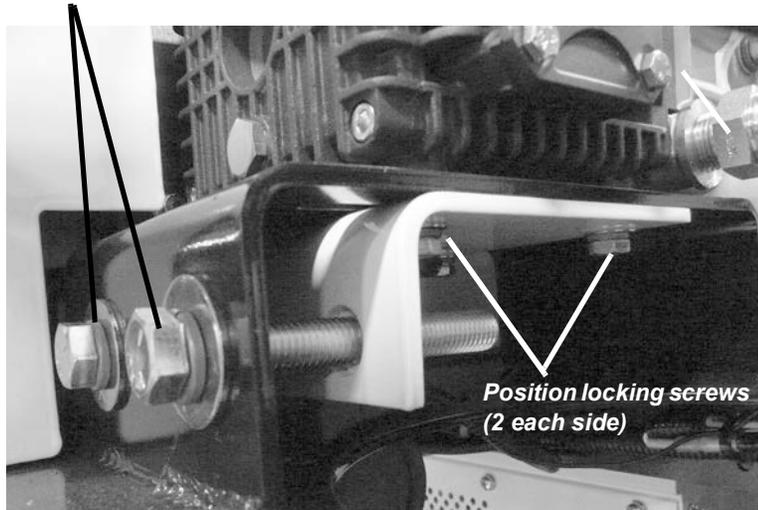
Use the tension screws on the pump mounting plate to loosen and tighten the blower belts.
